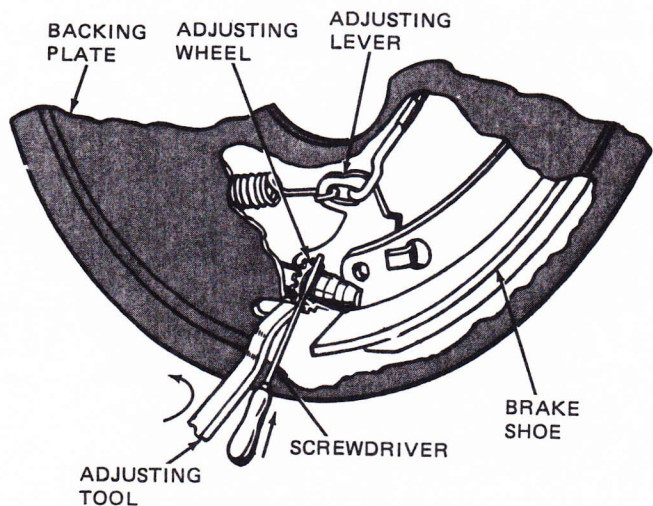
Using a screwdriver to hold the adjusting lever off the adjusting screw so it can be turned with the adjusting tool. (Bendix Corporation)
